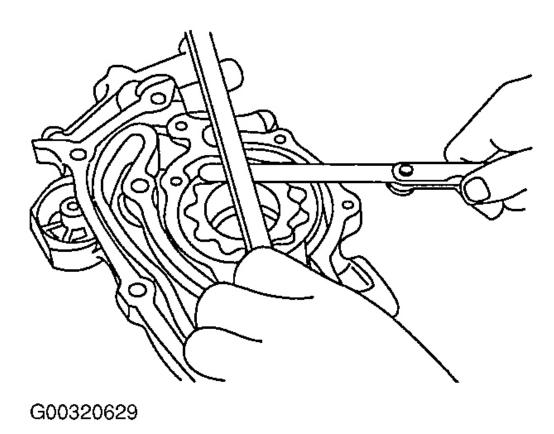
Measuring Side & Body Clearance Courtesy of KIA MOTORS AMERICA, INC.
